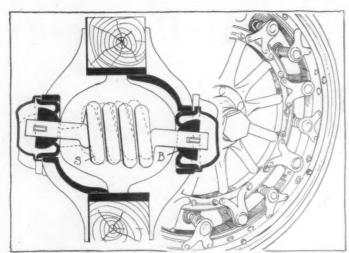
TWO VIEWS OF SEATON SPRING WHEEL Resiliency is obtained by horizontal coiled springs
